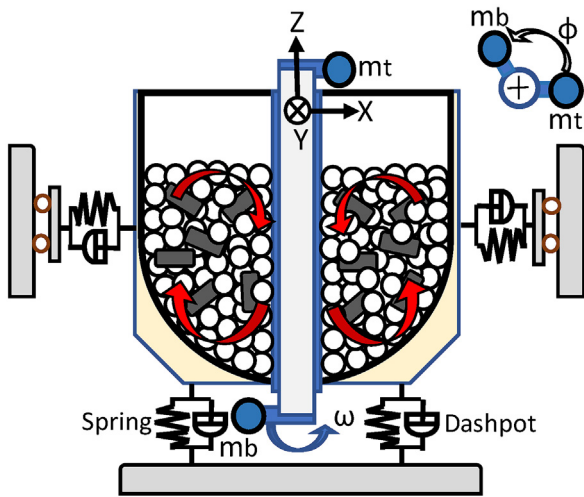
Schematic of a bowl-type vibratory finishing machine with media (cross-sectional view).
